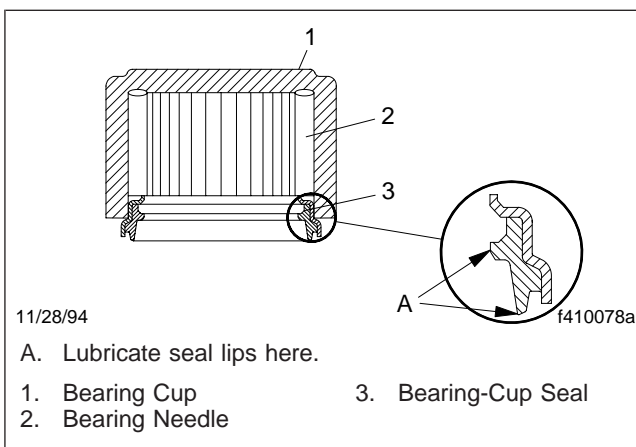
, Sectional View of a Half-Round End-Yoke U-Joint Bearing Cup
